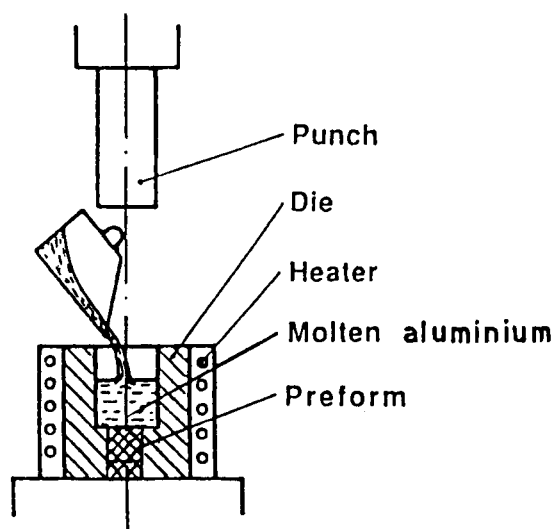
Schematic illustration of the squeeze casting apparatus.
